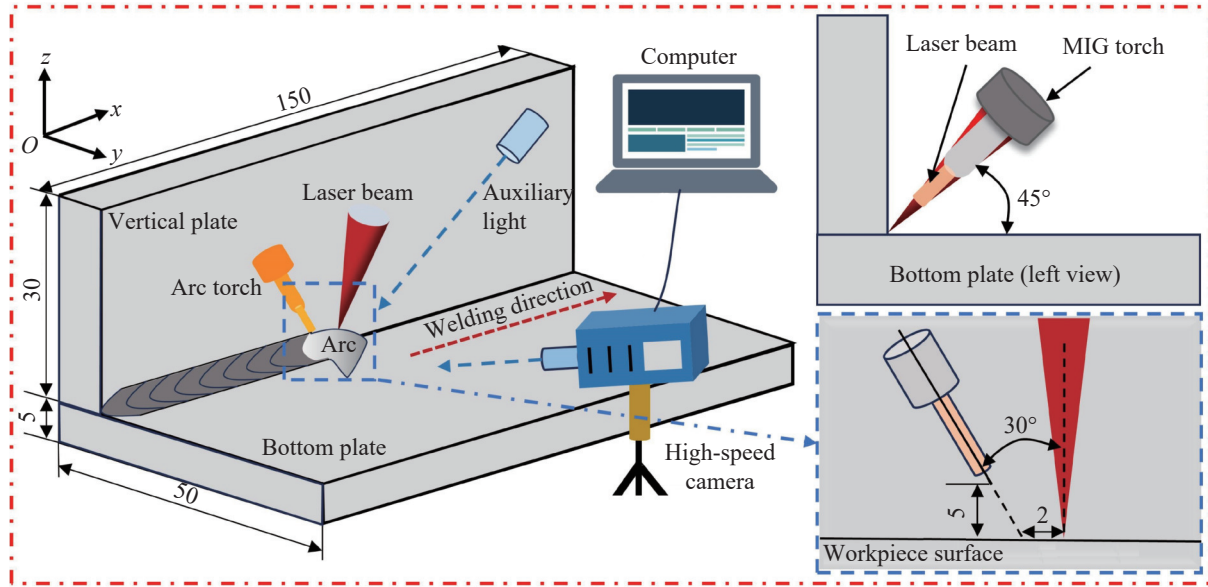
Schematic diagram of laser-MIG hybrid fillet welding system (mm)
